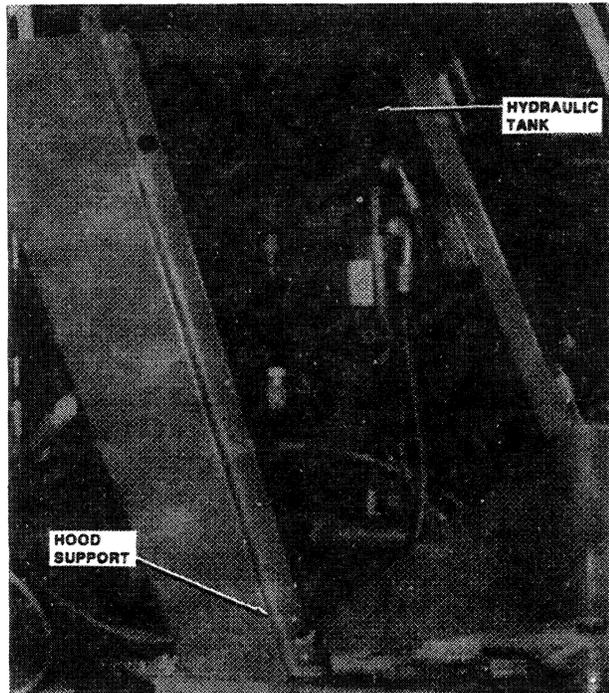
Hydraulic Tank and Hood Support Removal
